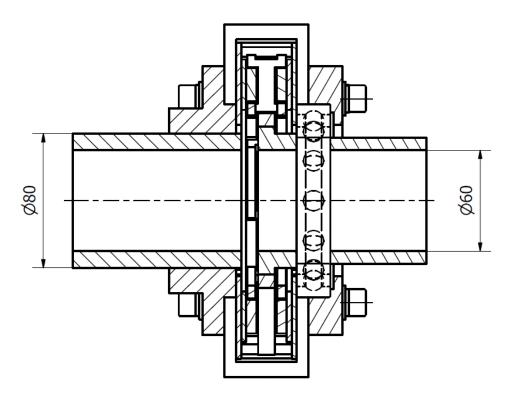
Cross-section A-A and External Diameter of Shaft 1 and Internal Hole
